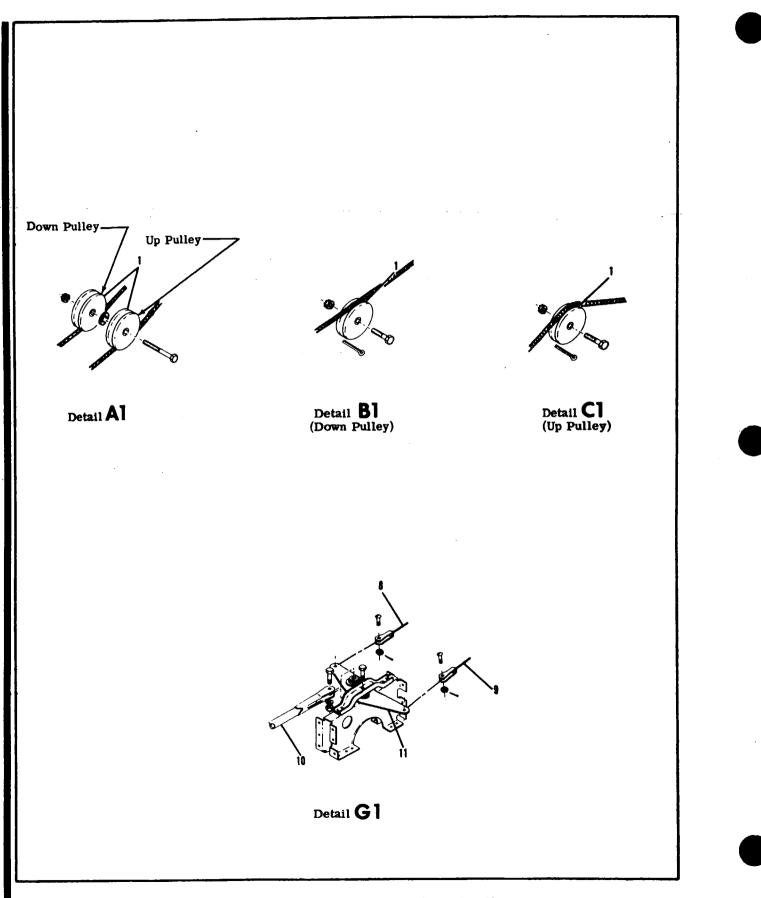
Elevator Control System (Sheet 2 of 2)
